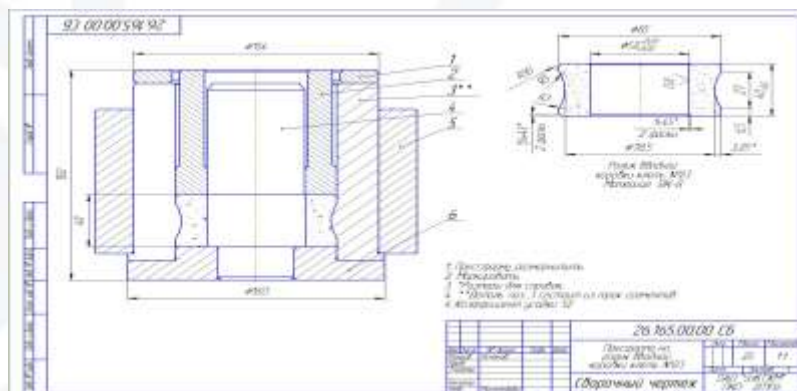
Assembly drawing of the mold for the roller of the introductory box of the crate № 23.
